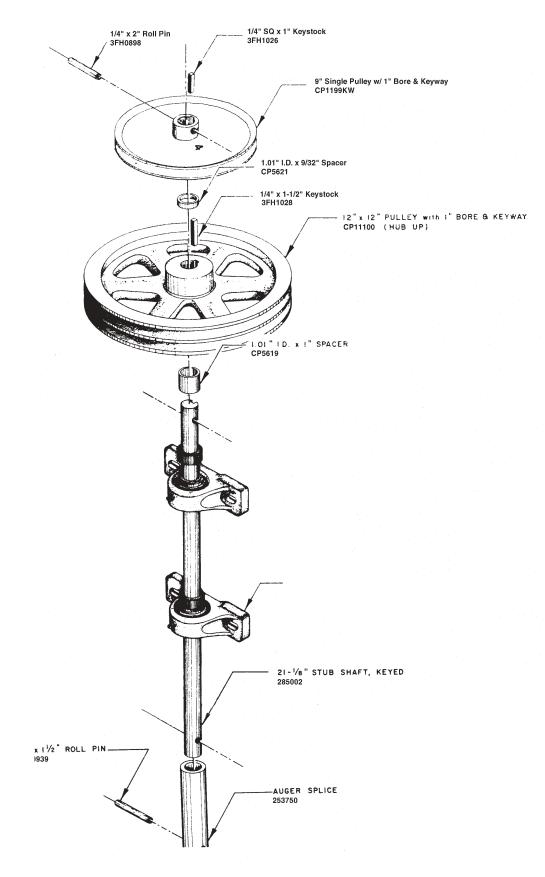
Stub Auger Assembly No. 4 (280004)
